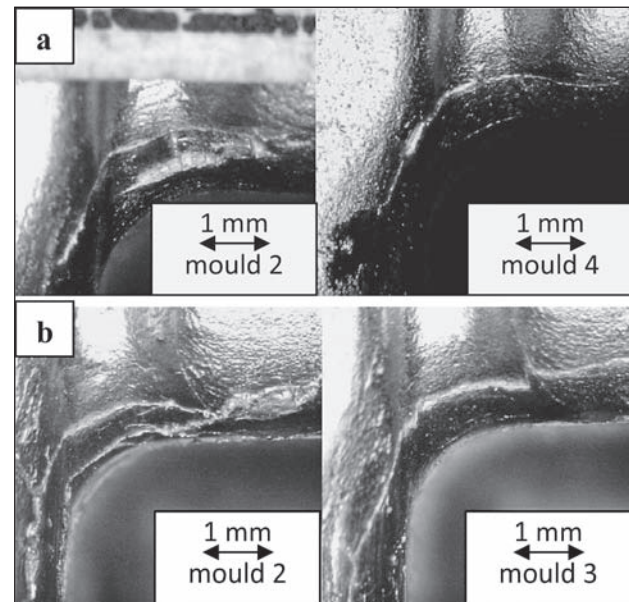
Defect-fins on observed location on castings after a) 9 800 cycles (mould 2 and 4) and b) after 22 500 cycles (mould 2 and 3).
